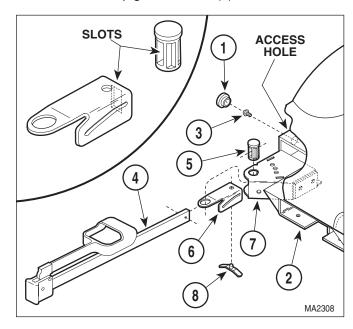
Stirrup Assembly And Components Removal / Installation
